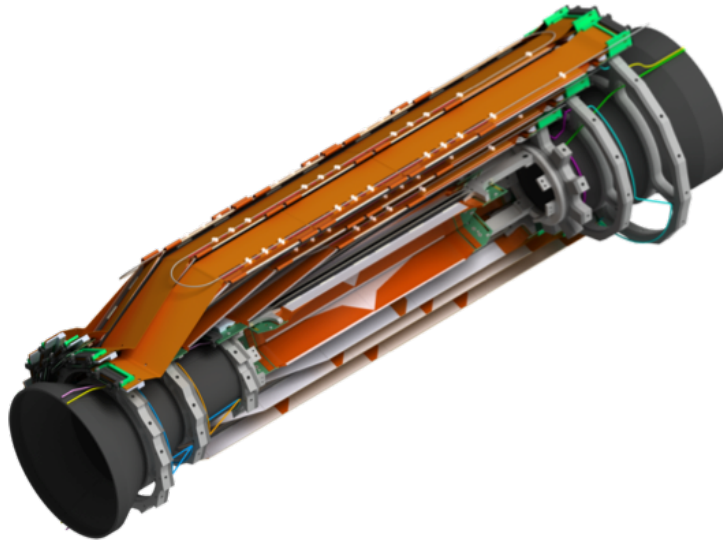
CAD drawing of the silicon strip detector [53]
